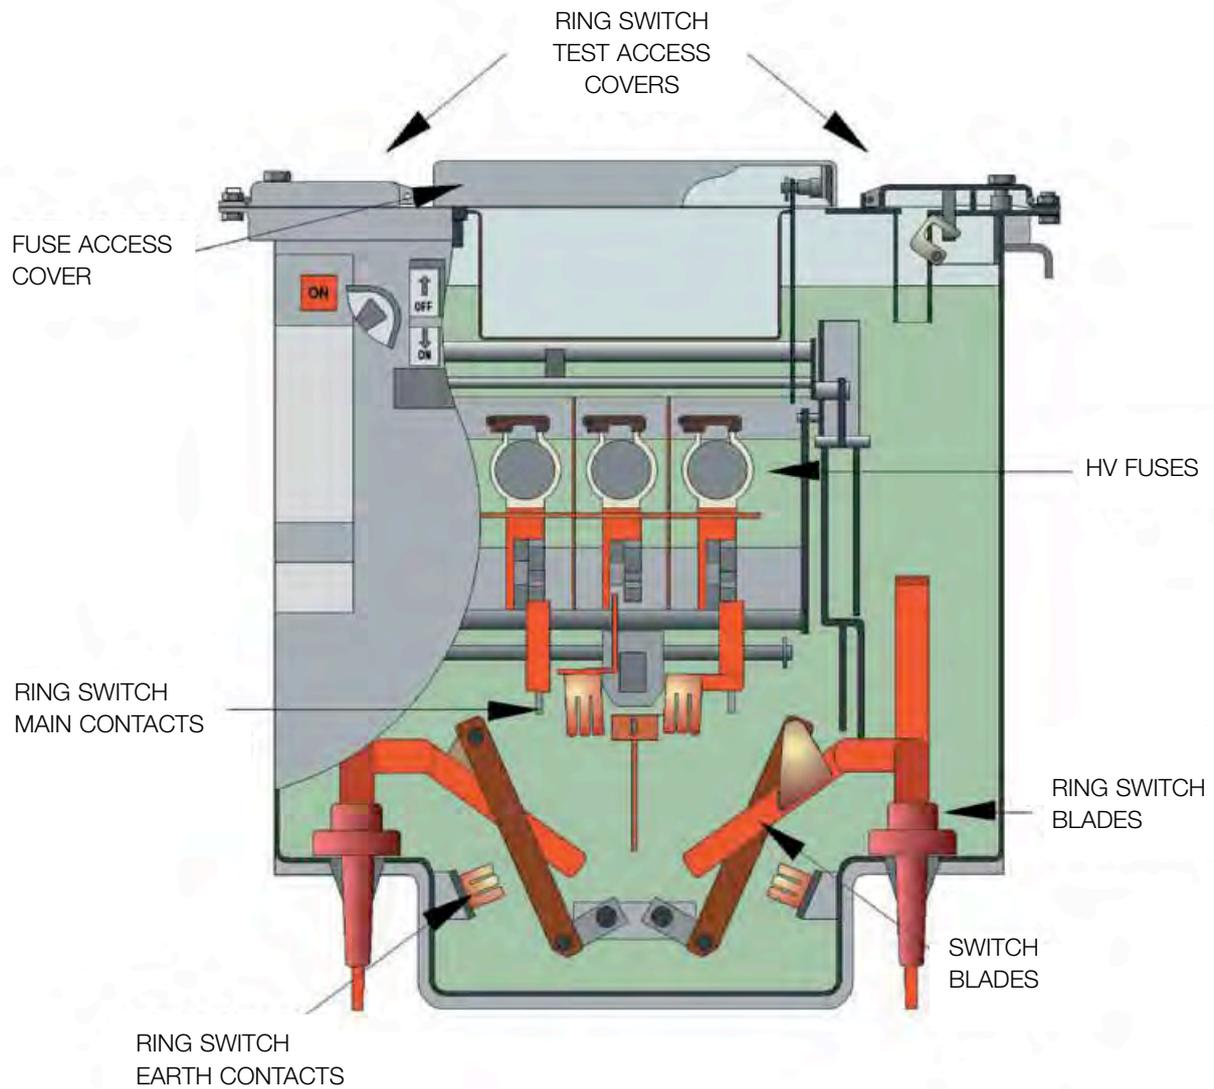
Typical arrangement of an 11 kV oil-filled common tank ring main unit (incorporating two ring switches and one fuse switch)
